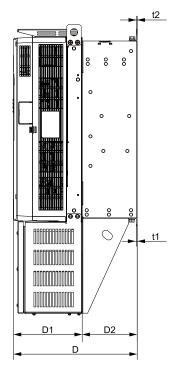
Exterior and Mounting Dimensions Diagram 6
